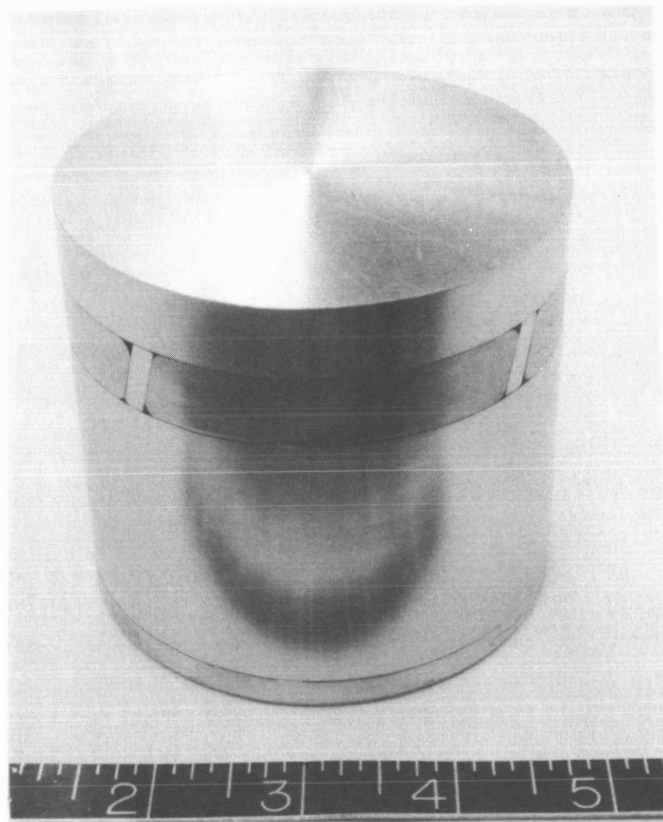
Assembly with Back Shroud and Lower Pressure Plate, and Cores
